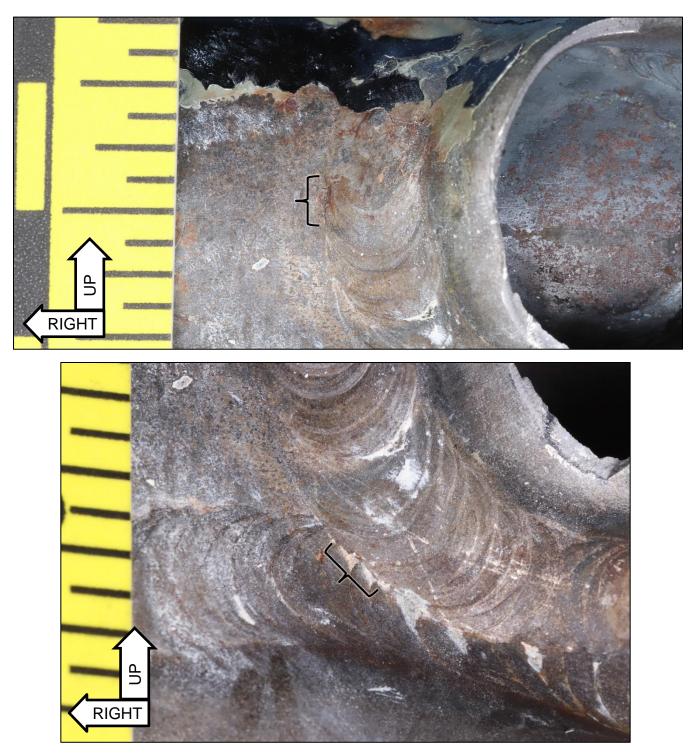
Forward face of the left NLG actuator attachment foot after cleaning with mineral spirits showing crack indications at the weld toe (locations marked with unlabeled brackets) as detected using an optical stereomicroscope.
